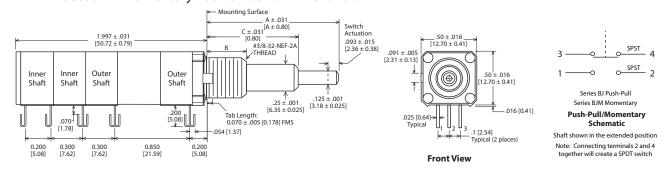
SHA-22: Concentric Shafts, B22, 3 Potentiometer(s) or RS + MP, 3/8" Bushing
